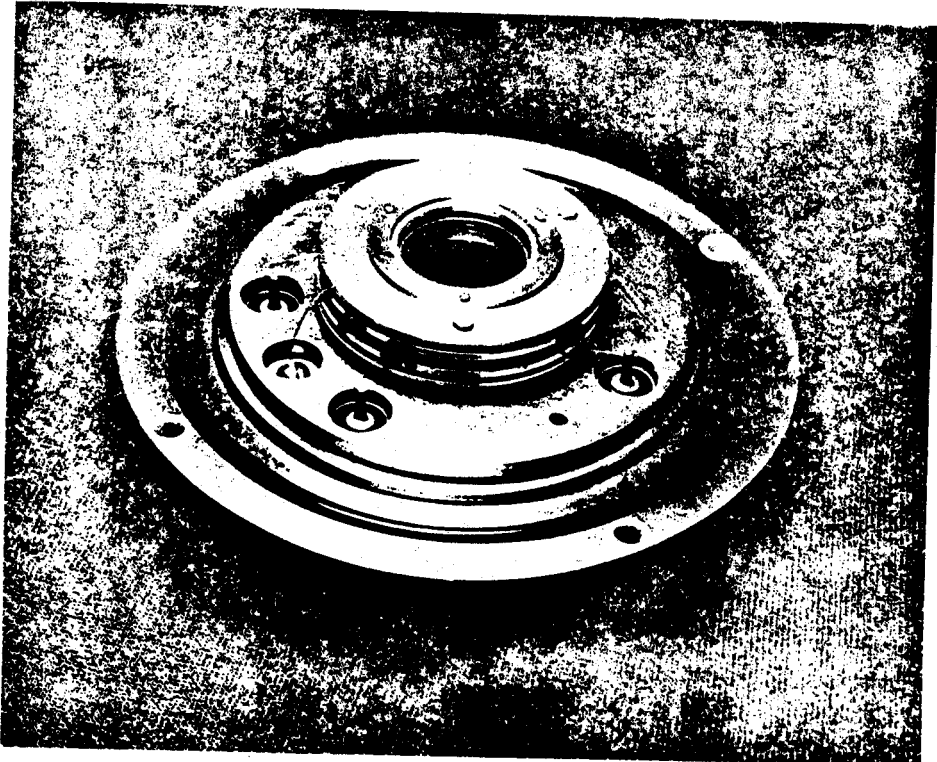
The CEMA mounted on its flange and ready to be bolted onto the flight tube.
